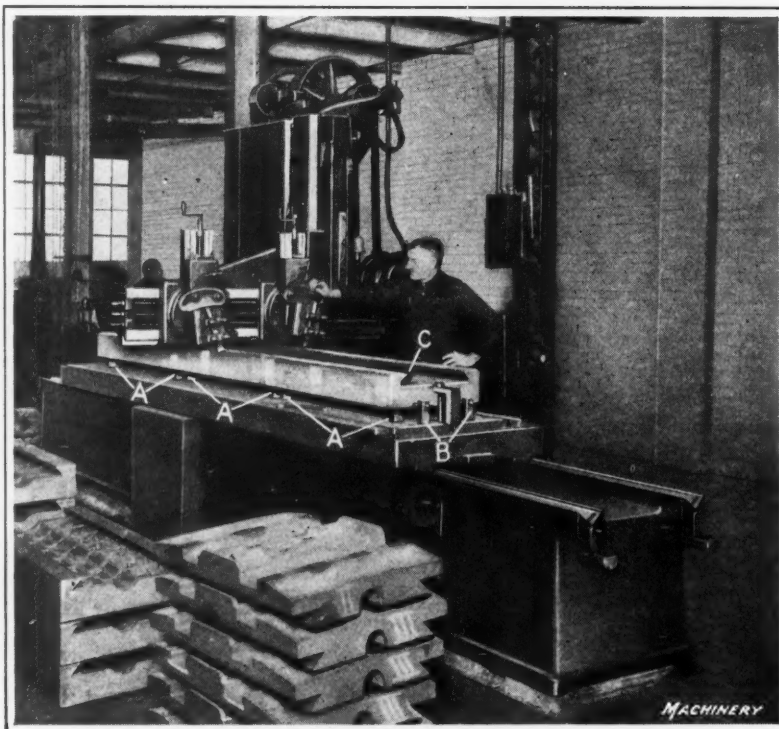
Open-side Planer equipped for machining a String of Three Castings for Tables of Horizontal Boring Machines
